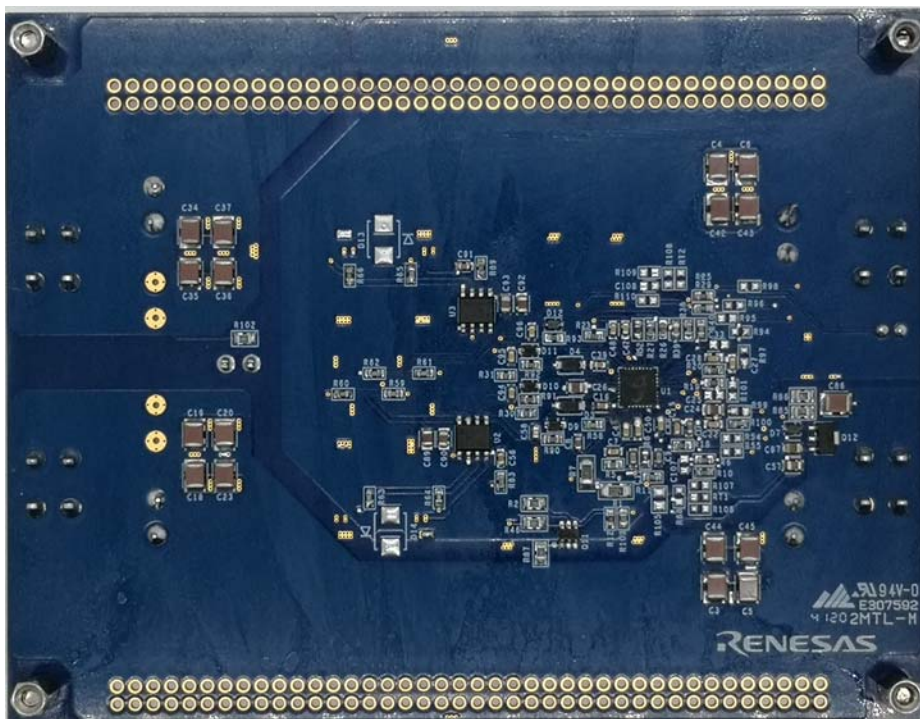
ISL81805EVAL4Z Evaluation Board, Bottom View
